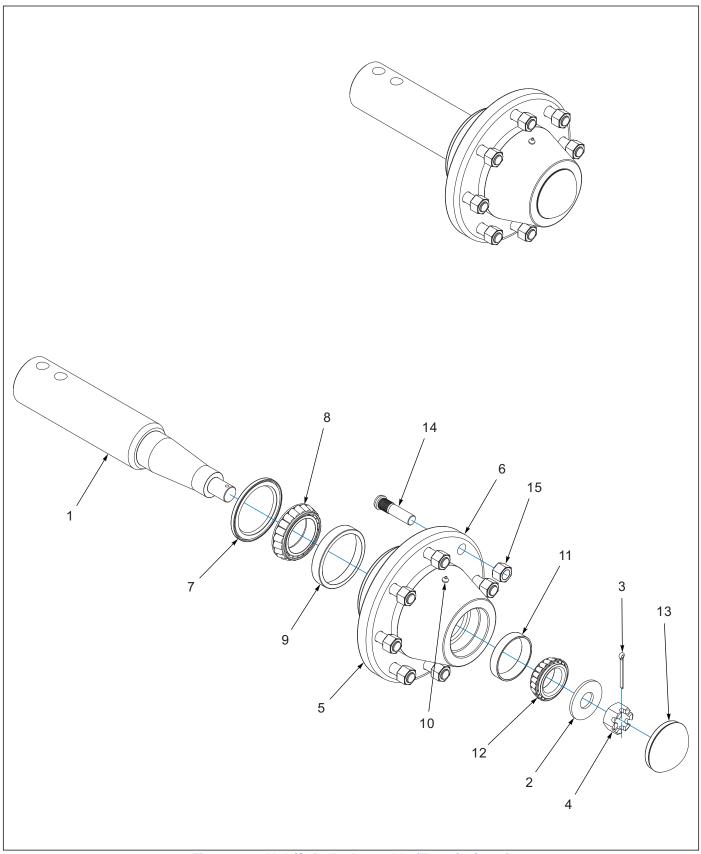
Hub/Spindle Assembly (To 02/01/2020)
